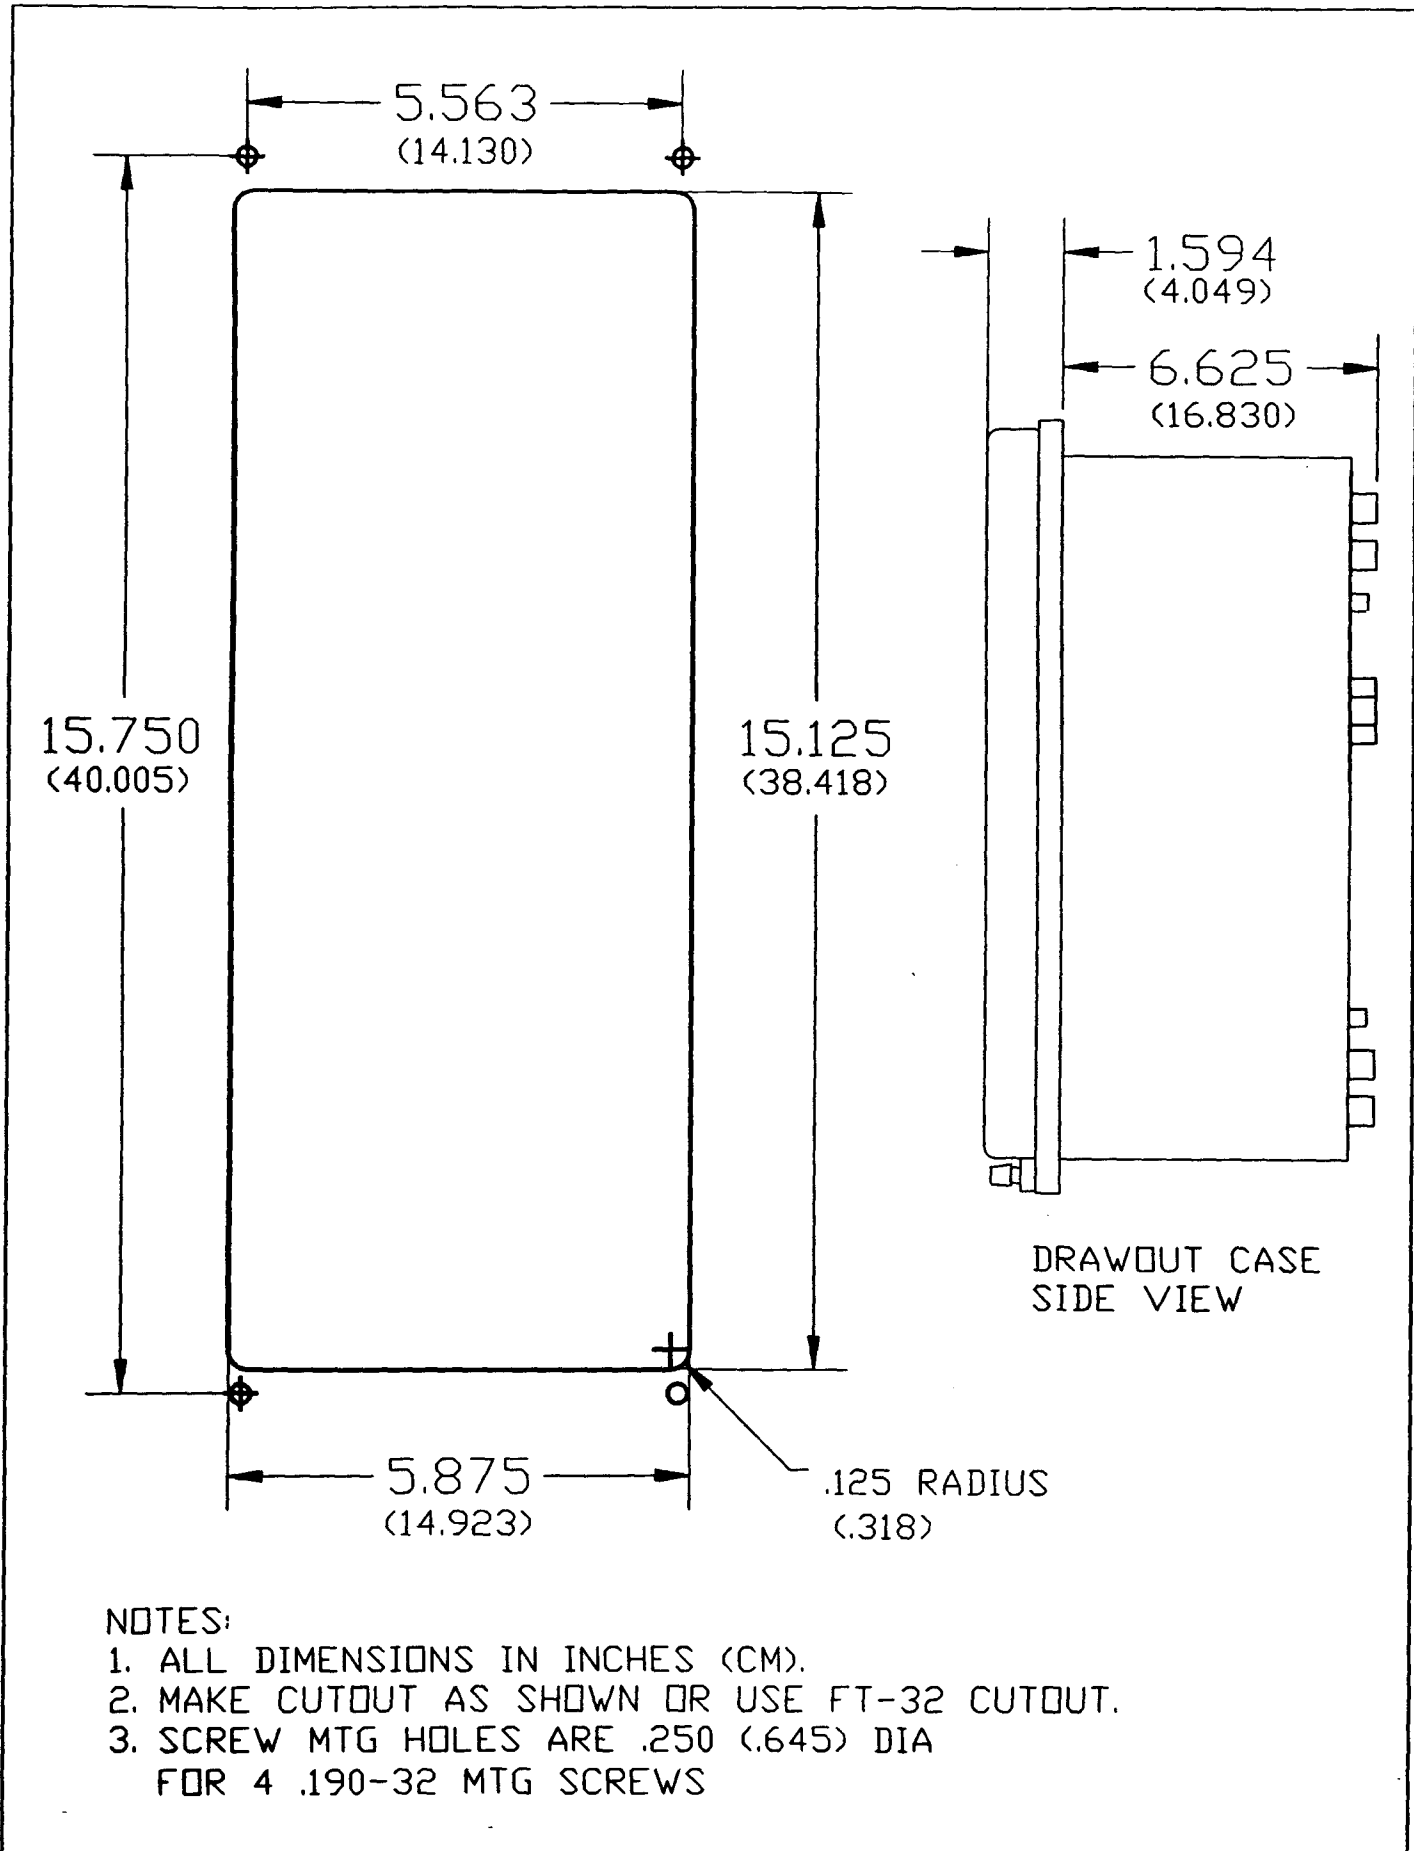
Cutout and Clearance Dimensions for IQ Data Plus II Drawout Case.
